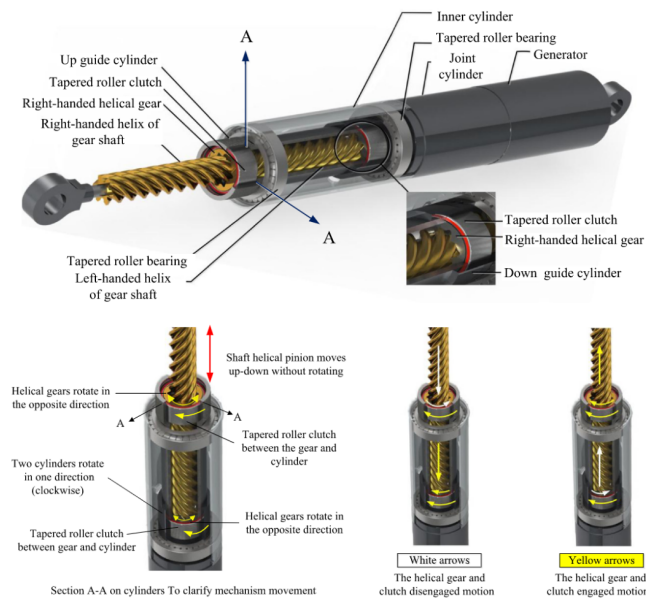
Design of the shock absorber containing helical gears (top) and working principle (bottom). Reciprocal linear motion is converted into a one-way rotary motion with the use of the helical gears and tapered roller clutches. As the helical pinion shaft moves up or down, the two helical gears will rotate oppositely. Due to the two tapered roller clutches the cylinders rotate unidirectionally, which is the input motion to the generator [21].
